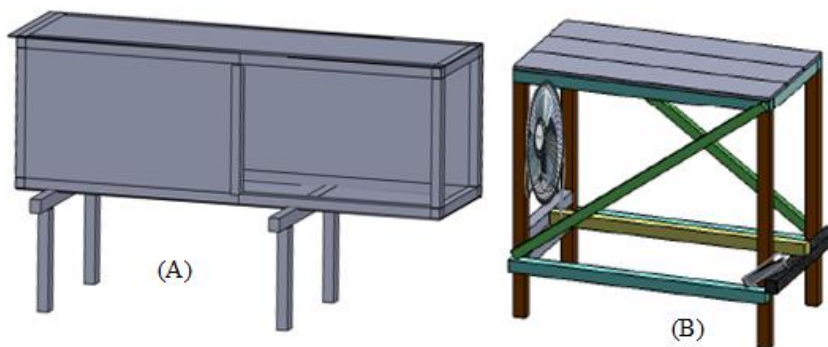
Part A and Part B on the old design of the dust filter tool.
